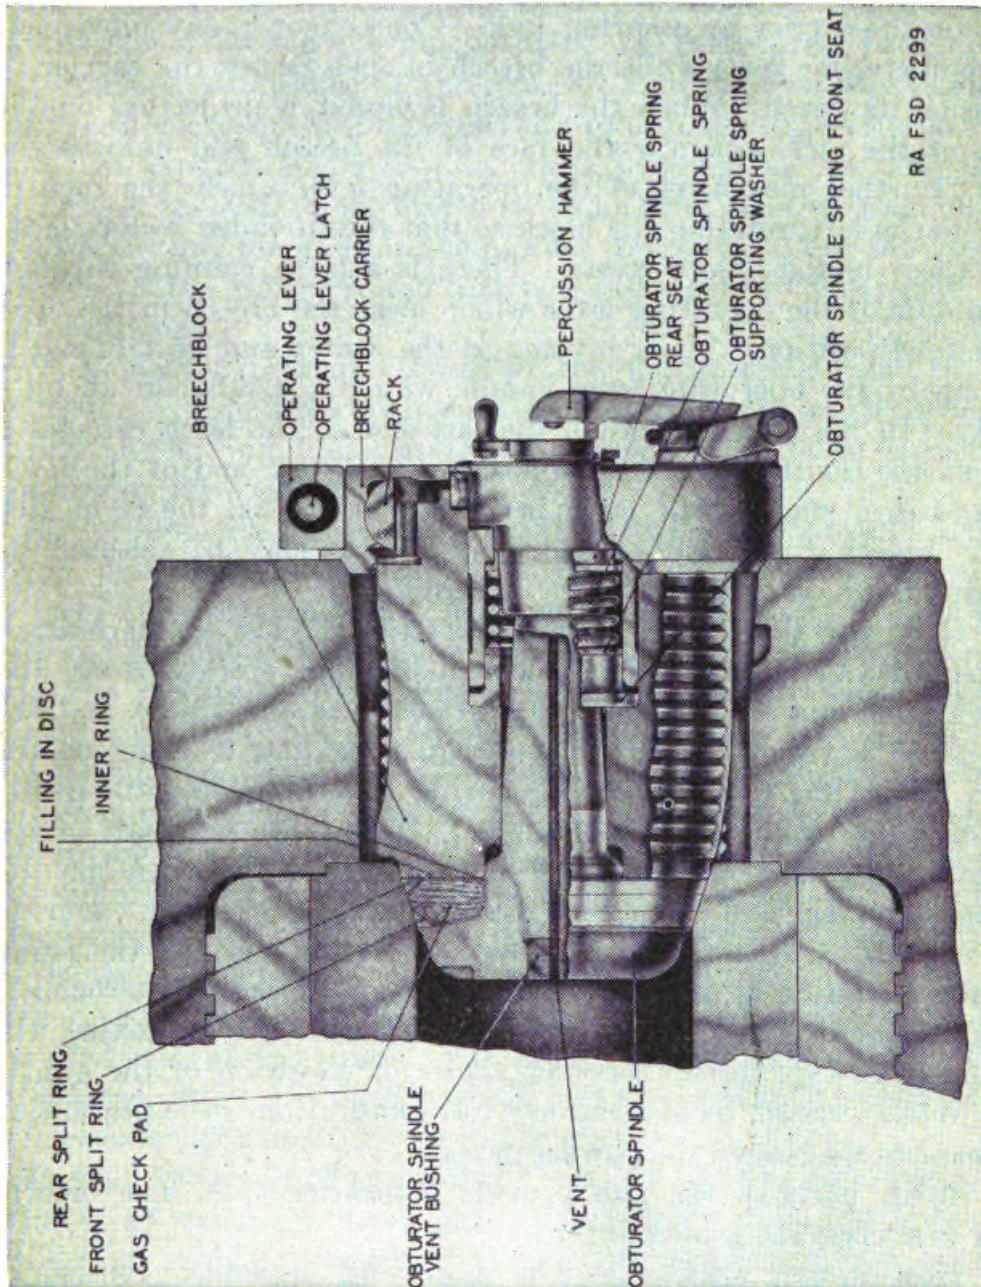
Breech mechanism, 155-mm gun M1918—sectioned view.
